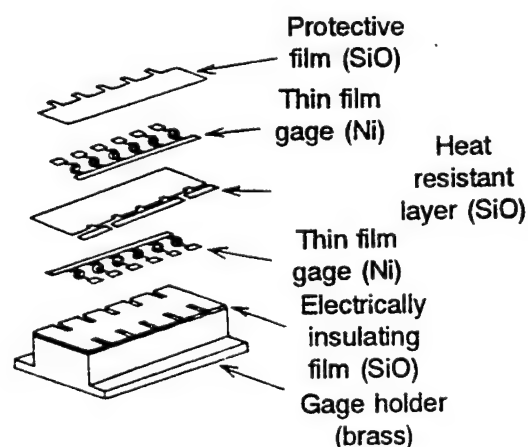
Exploded View of the Multi-Layered Thin Film Gage after Hayashi et al, 1989.
